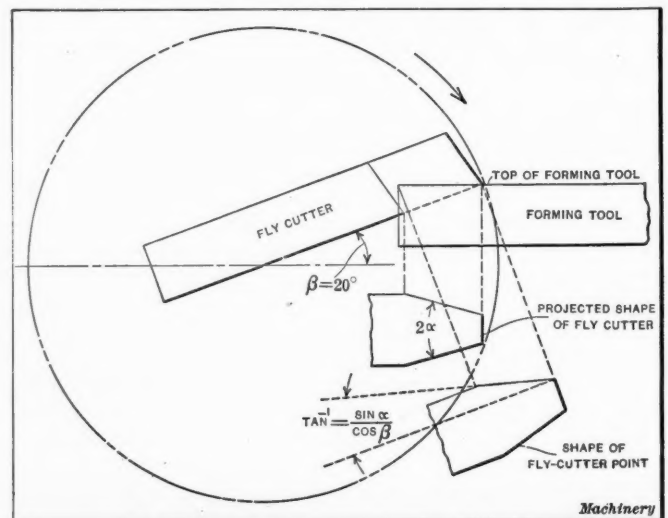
Method of setting Fly Cutter to obtain the Required Clearance on the Forming Tool
